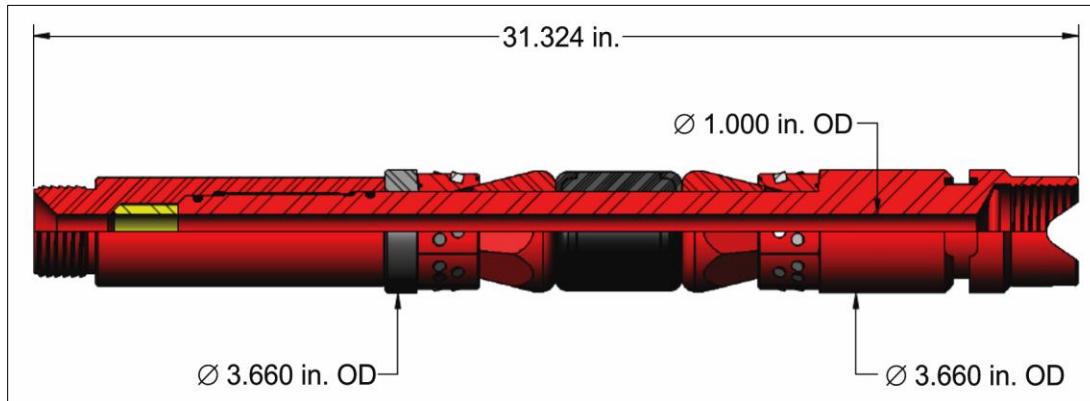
Fracturing plug assembly, 10 kpsi, 325°F, 4 1/2-in. metallic-ceramic composite (MCC) button slips, used in horizontal wells. (Model B)
